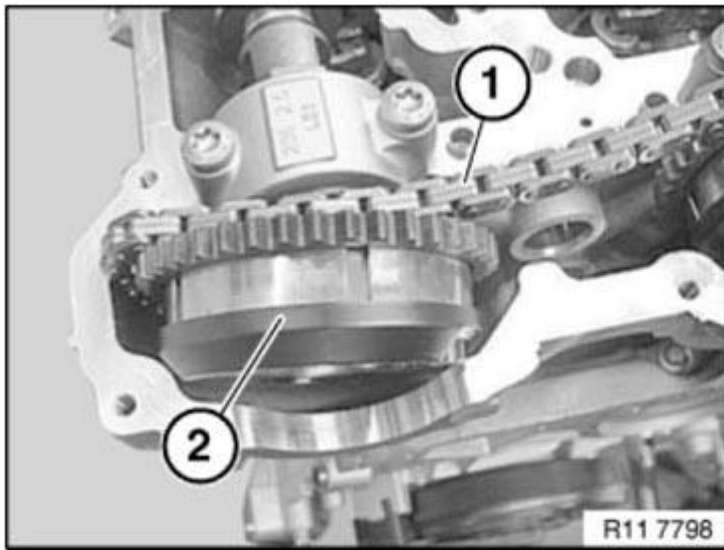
Identifying Exhaust Adjustment Unit And Timing Chain
